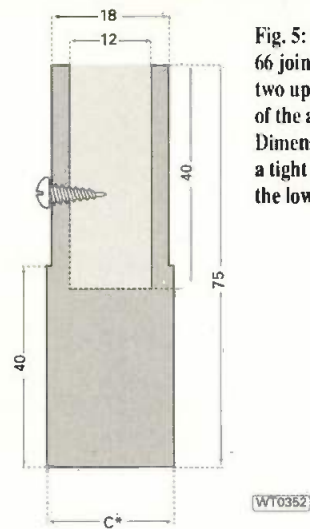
The Nylon 66 joiner for the two upper sections of the antenna. Dimension C to be a tight fit inside the lower tube.
